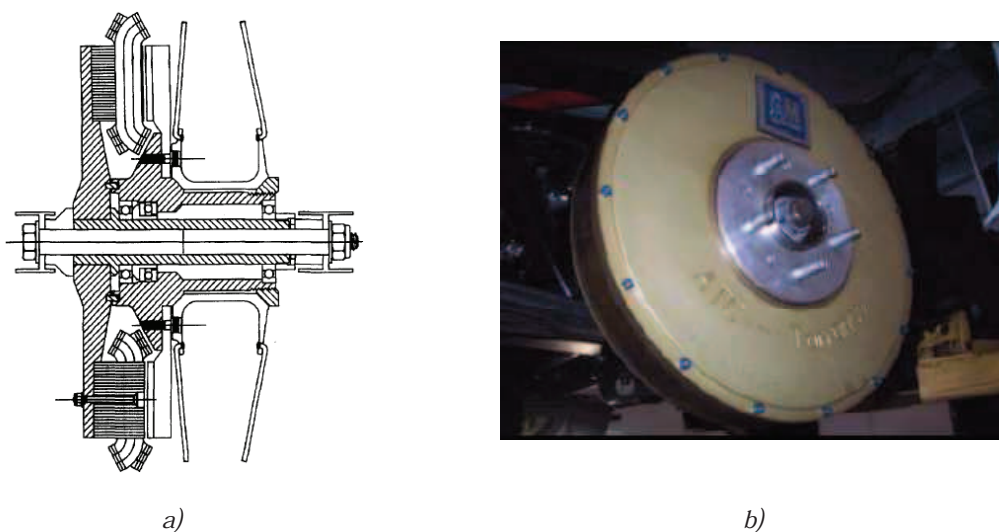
In-wheel axial flux machine a) solar vehicle [22] and b) hybrid car [28]
